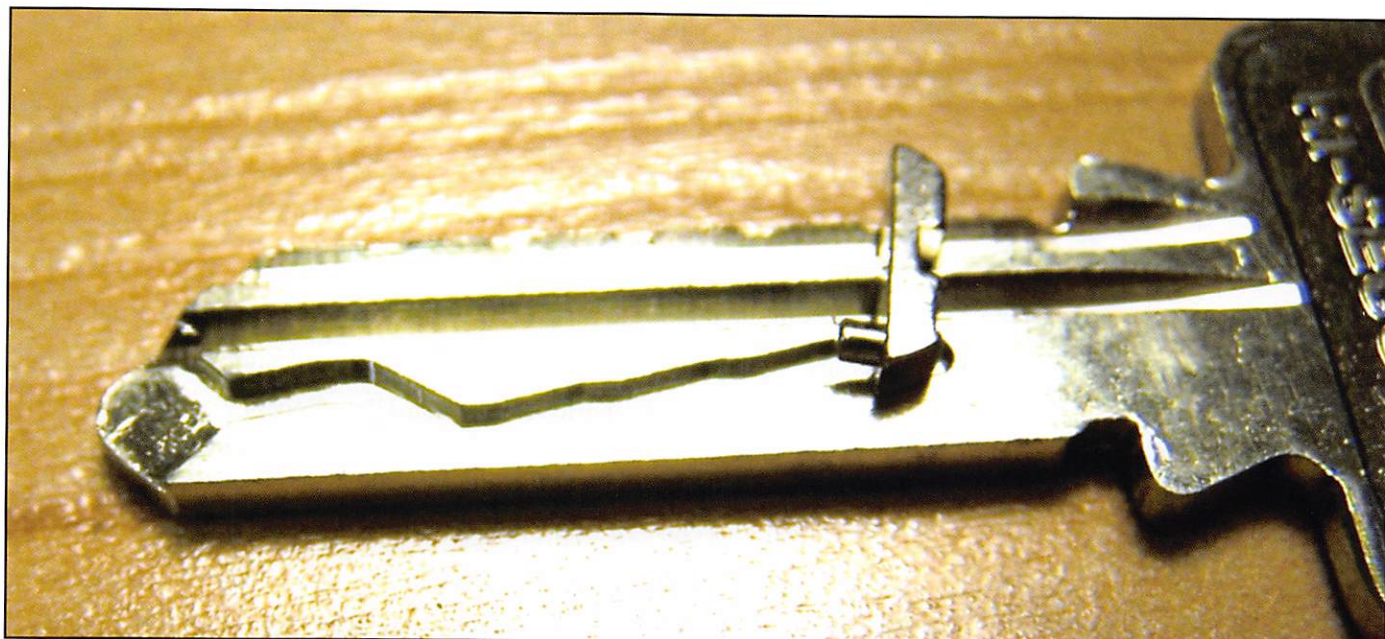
, A close up of the side milling on the key with a finger pin laying on top.
